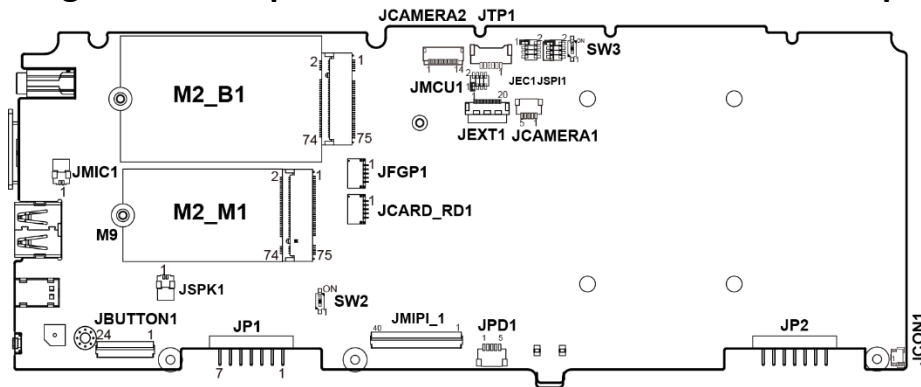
Jumpers and Connectors Location- Board Bottom
